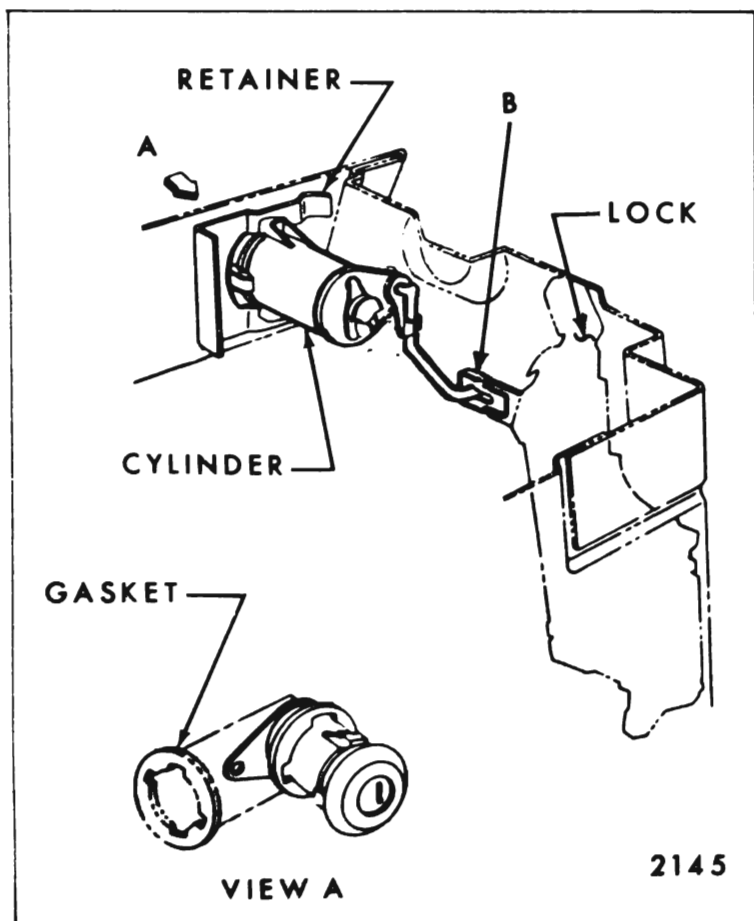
Front Door Lock Cylinder Removal - Chevrolet "B" Four-Door Styles
